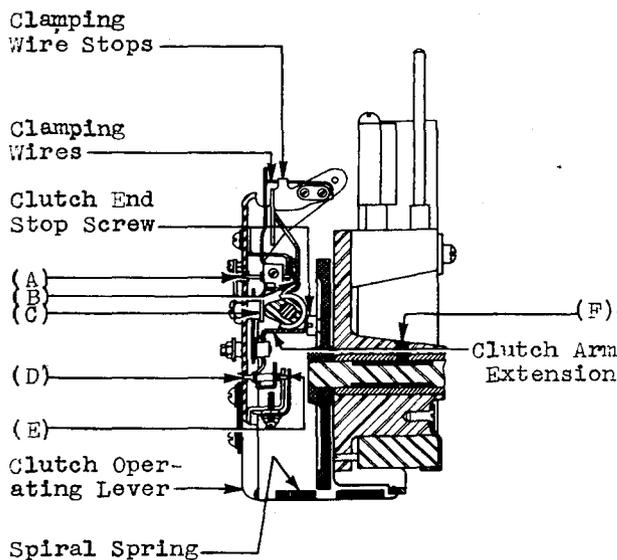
Balancing Mechanism and Clutch - Cross Section
